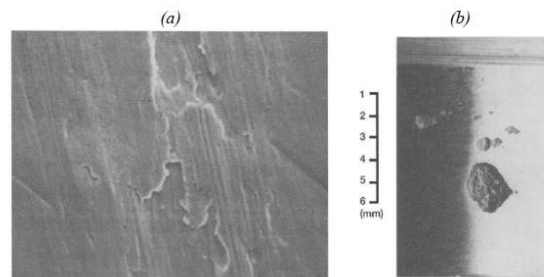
Examples wear scar appearances due to fatigue wear mechanism. (a) Spalling wear and (b) Pitting wear [88].
